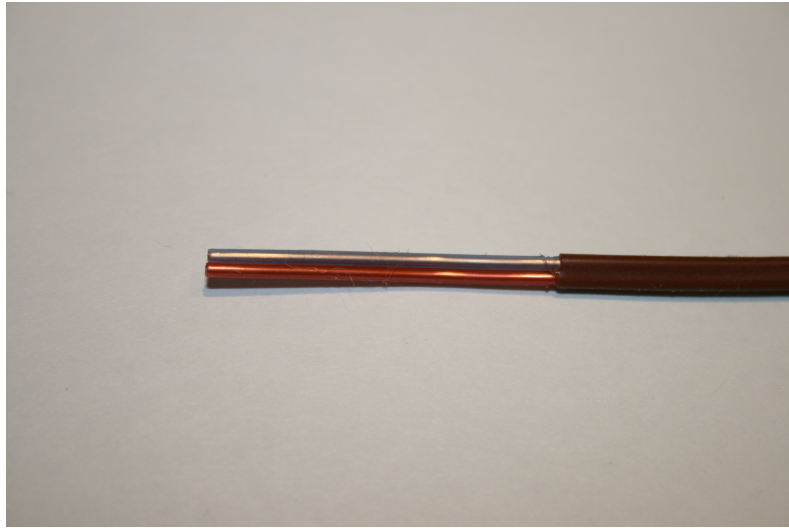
Thermocouple Manufacturing: Step 2. Thermocouple wire with the outer jacket stripped.
